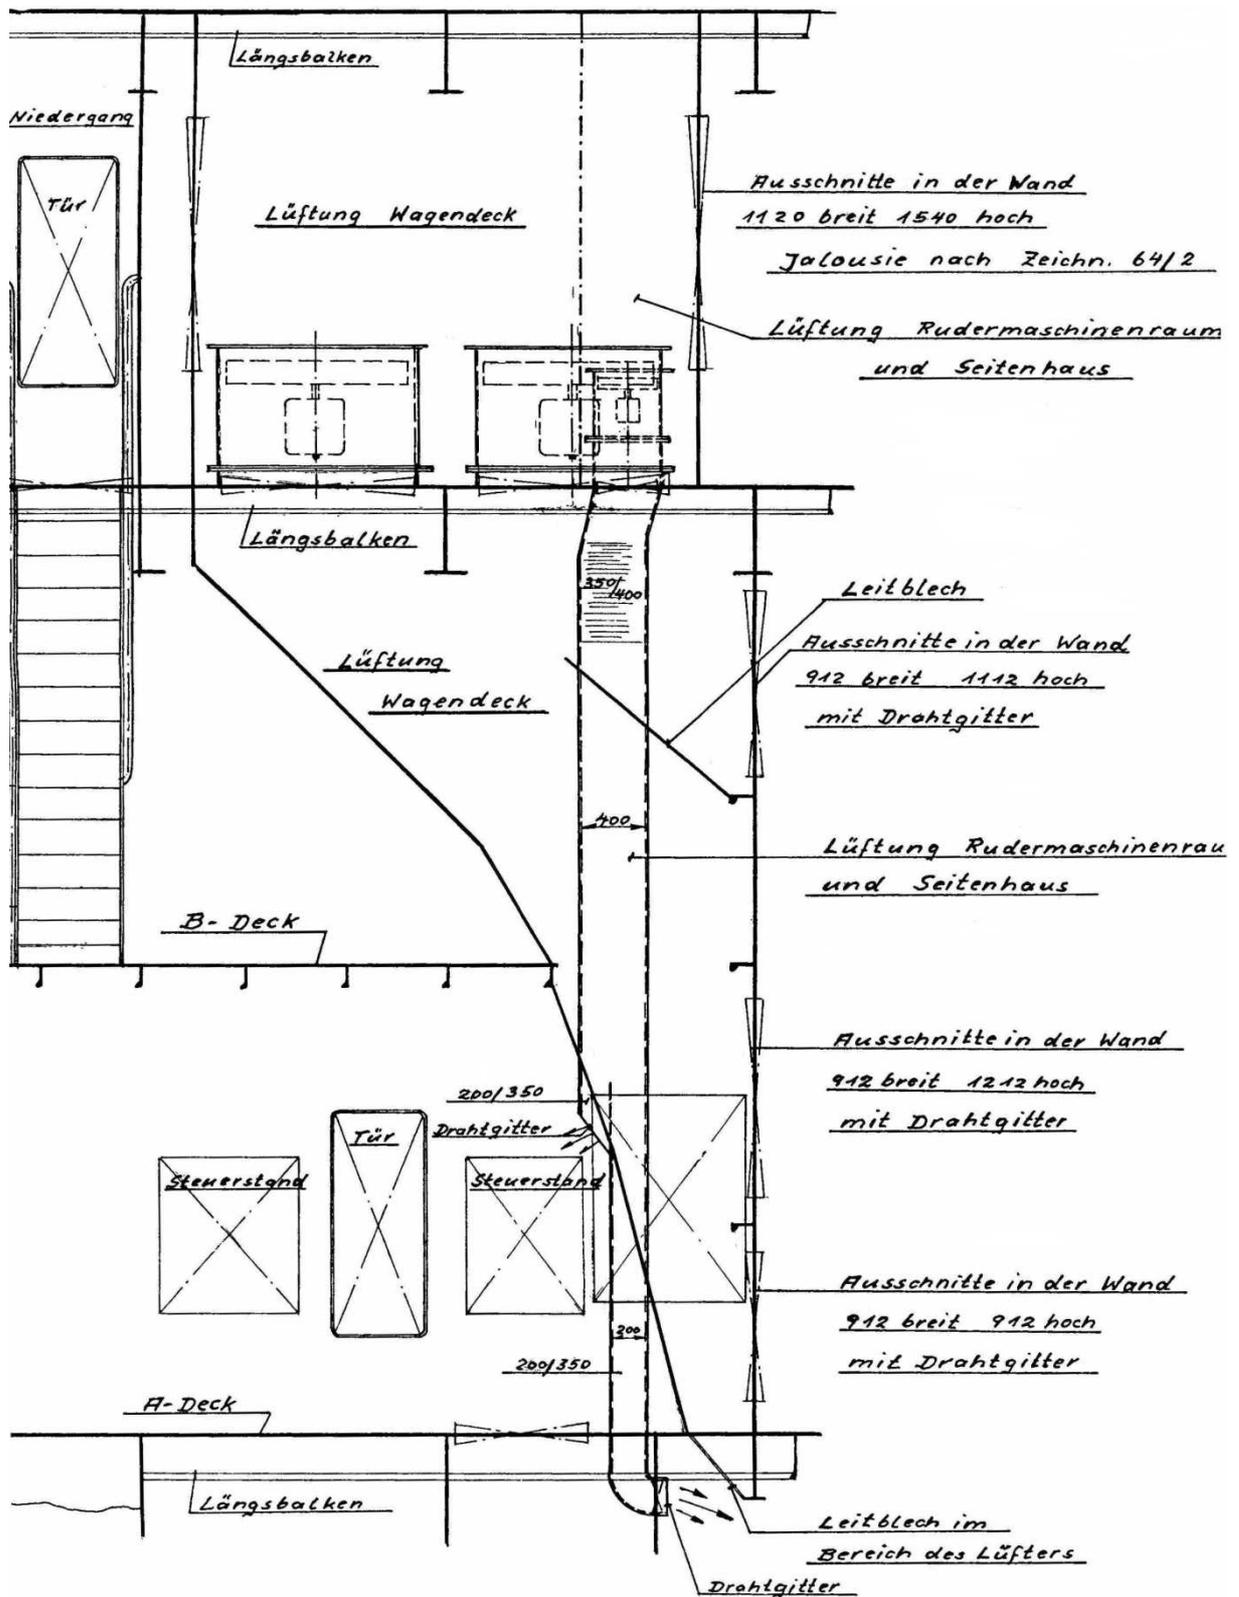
Aft Wing House, starboard side, lateral view, Drawing S590 – 24/2
